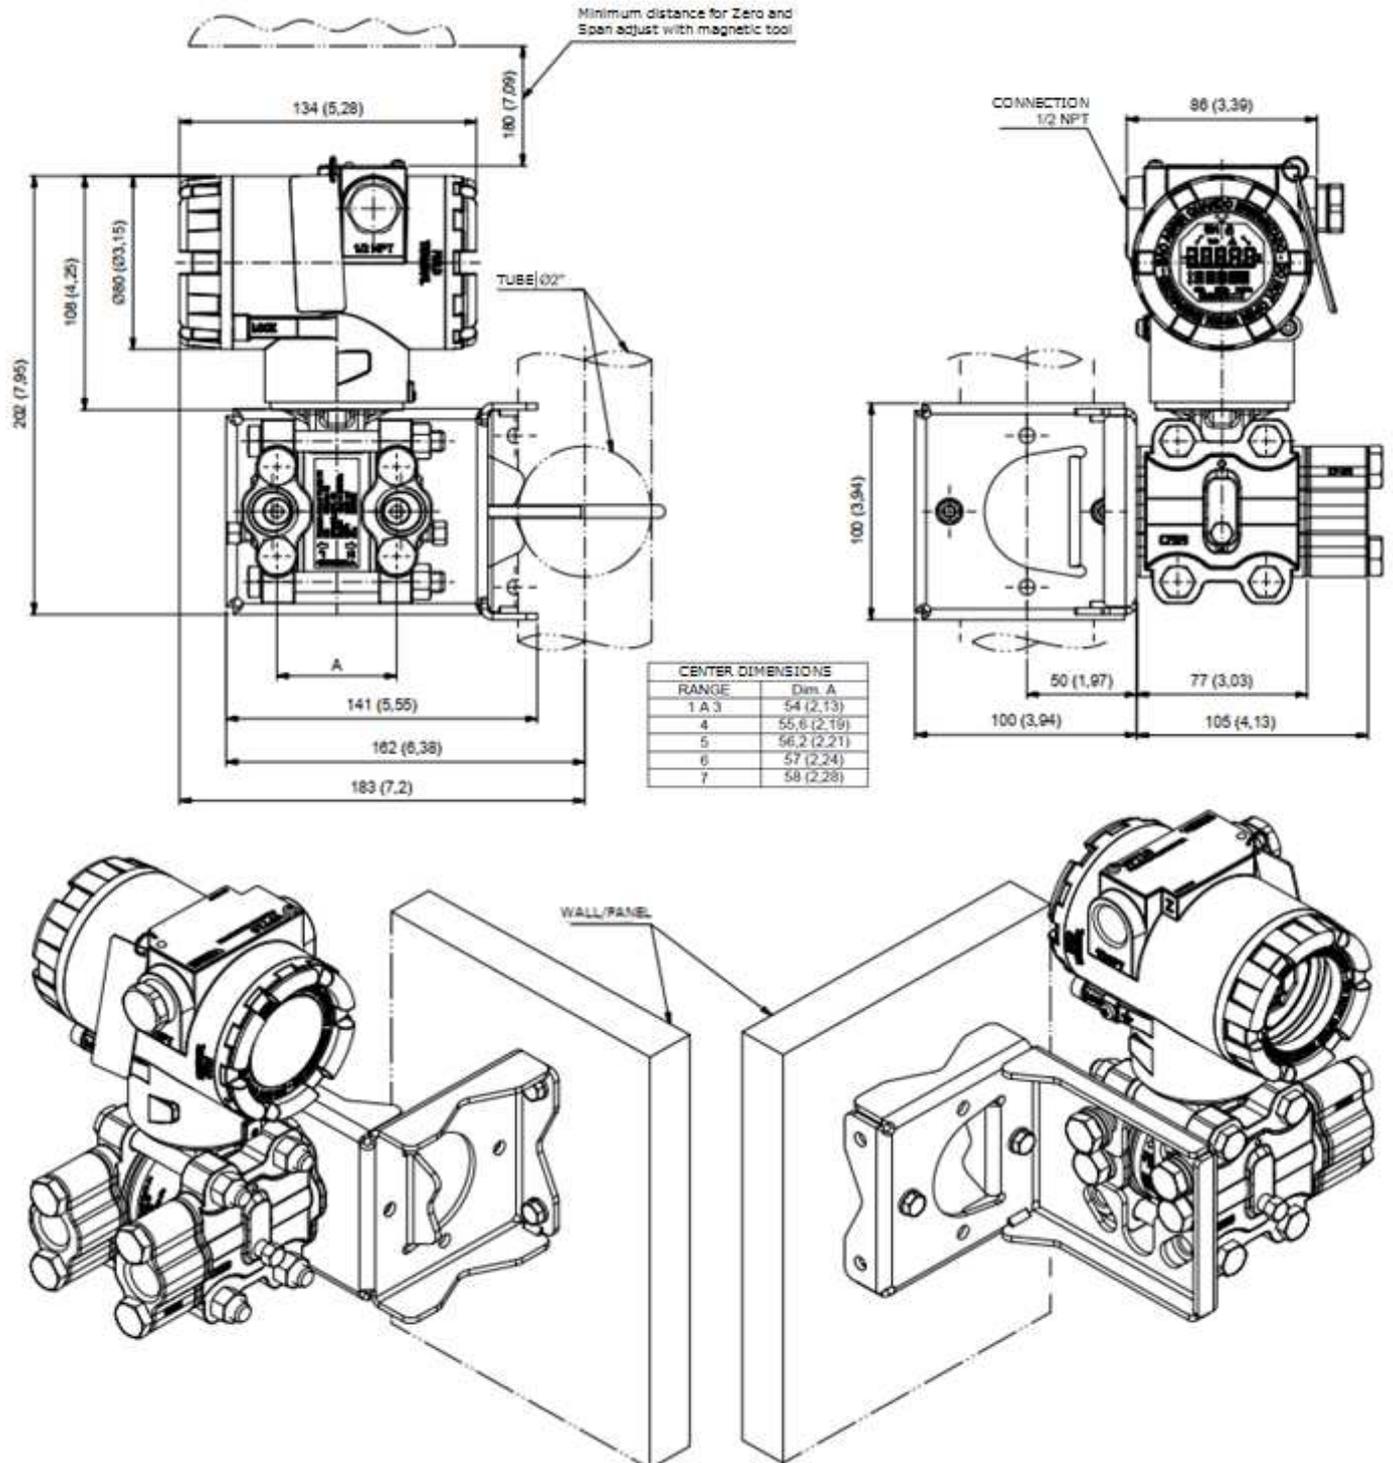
Dimensional drawing and mounting for VPT10-H.
